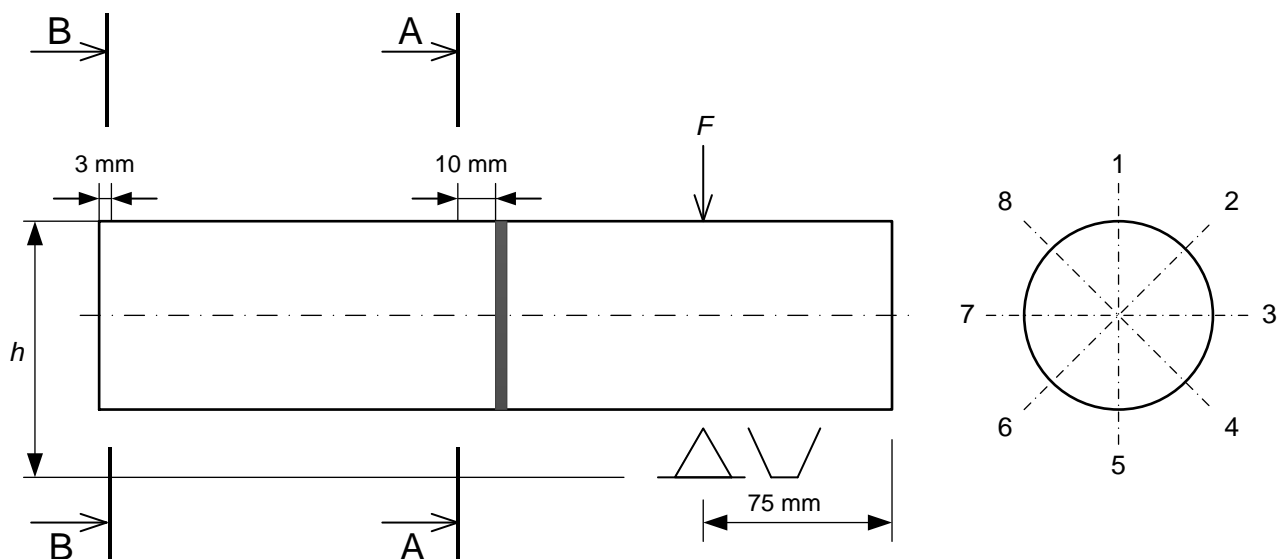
Principal scheme of basing and measuring welded samples
